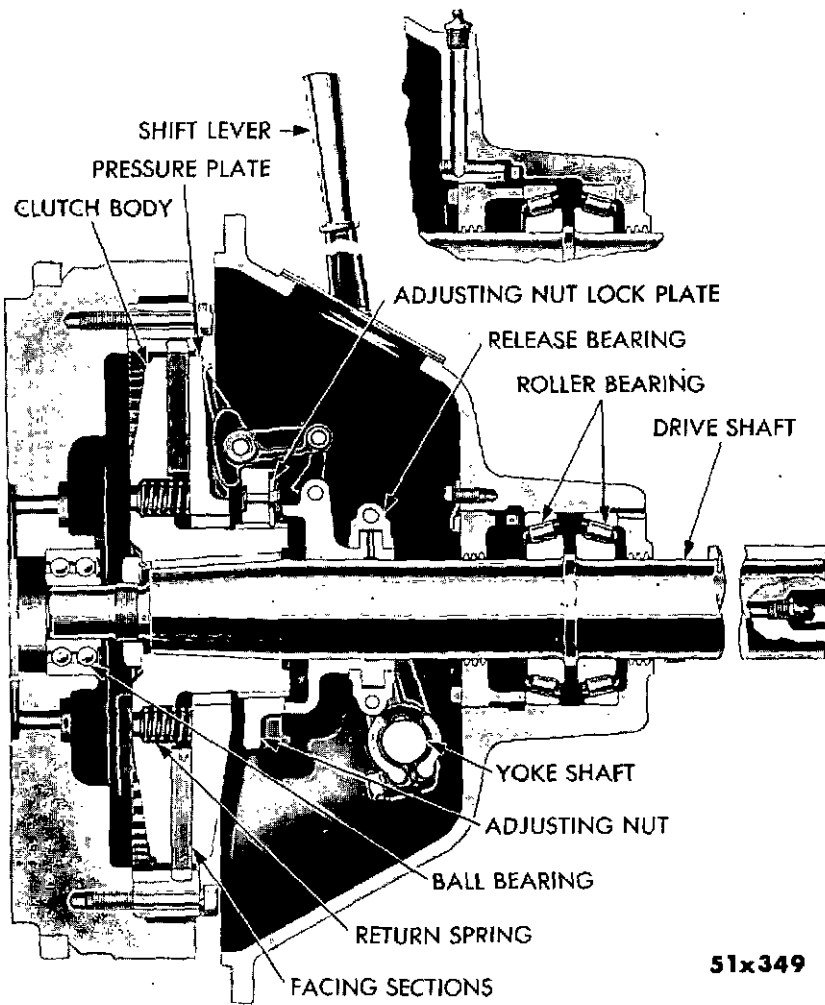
Power Take-Off, With Heavy Duty Clutch (Sectional View)
